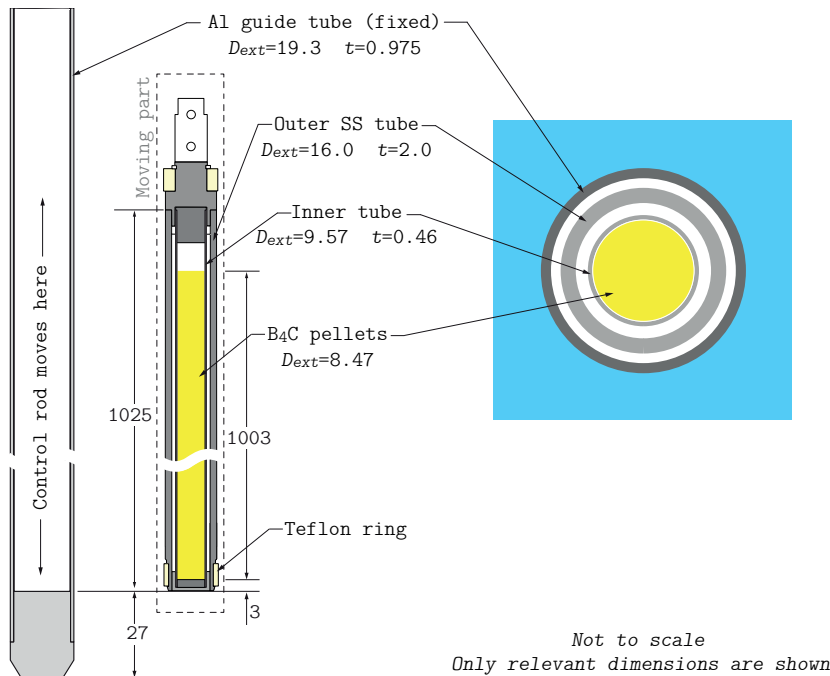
CROCUS B_4C control rods. Dimensions in mm.
